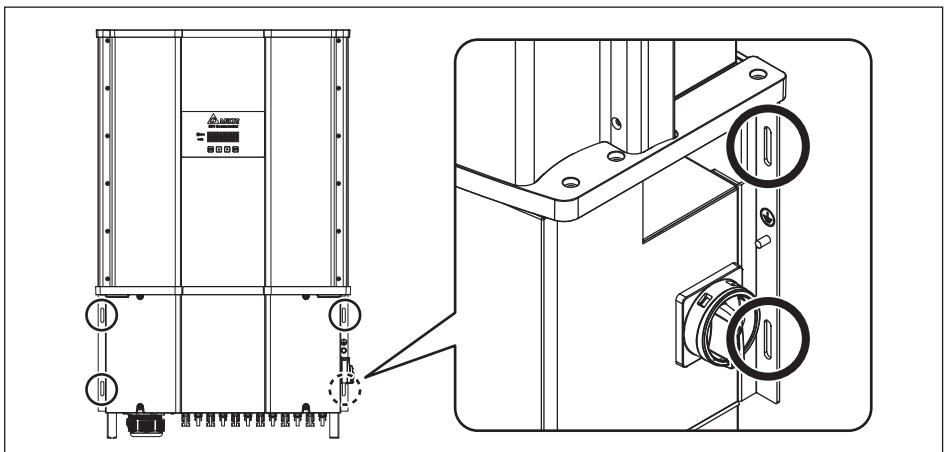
Specification of fixing WB for wall-mounting installation
